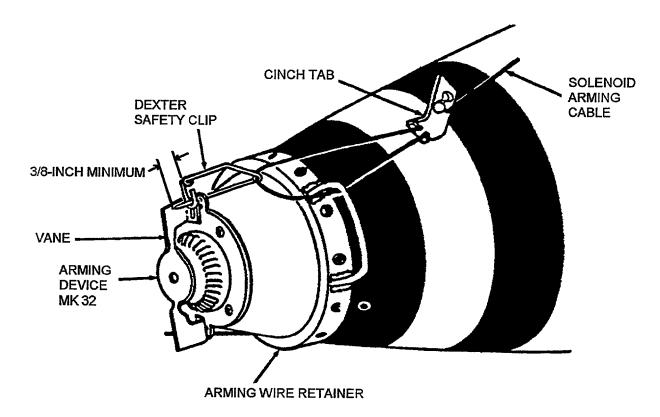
D. Tail Section Mk 12 Solenoid Arming Cable Rigging
